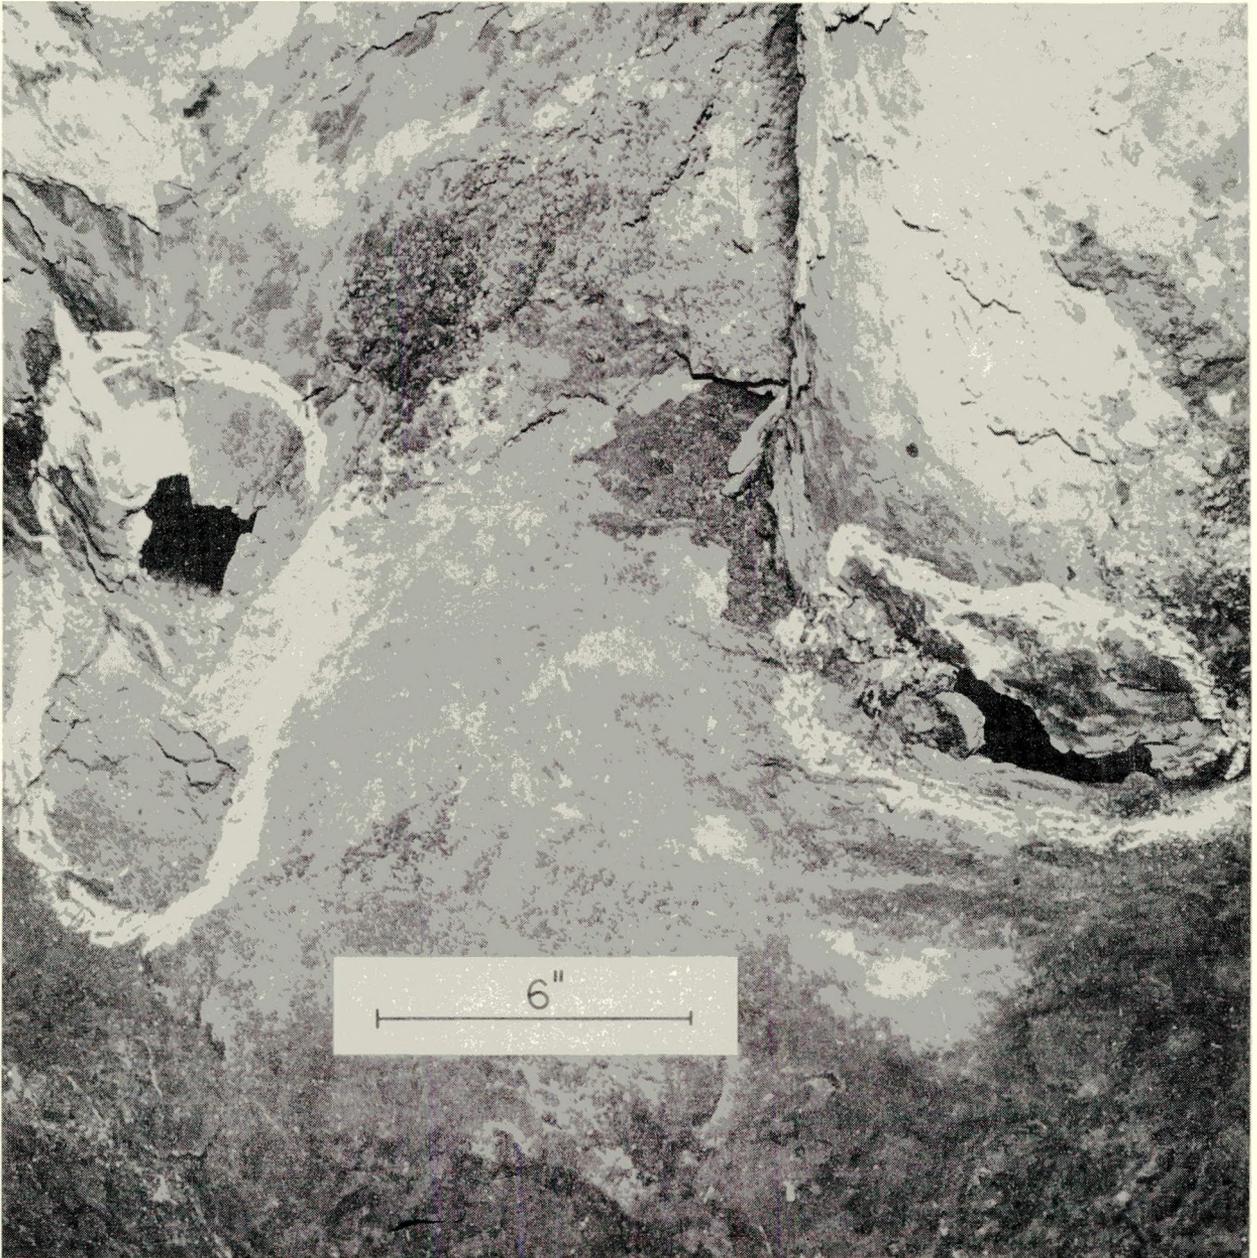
Anode and Cathode Nozzles After Weld Failure.
